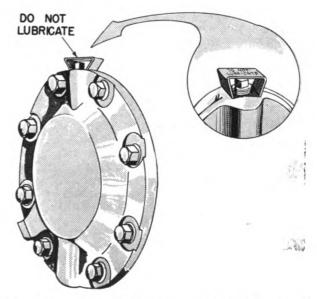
Method of sealing bearing cap with pipe plug and seal
